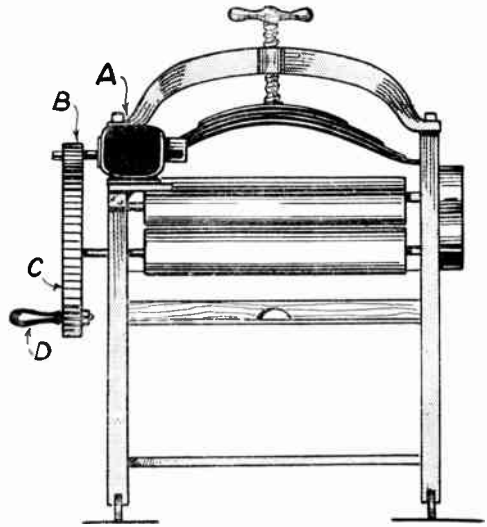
MOTOR DRIVE FOR DOMESTIC WRINGER.
